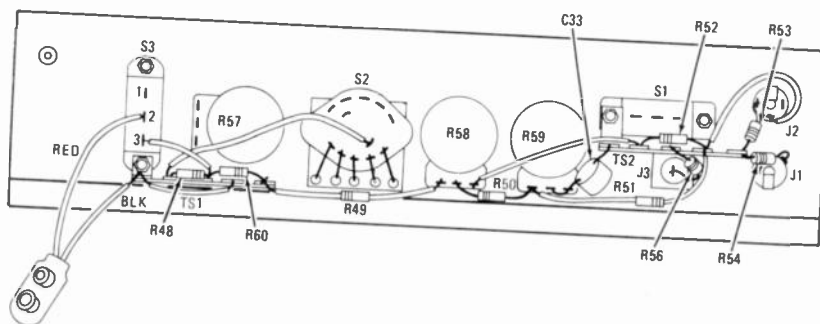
PARTS MOUNTED AND WIRED entirely on the front panel.
